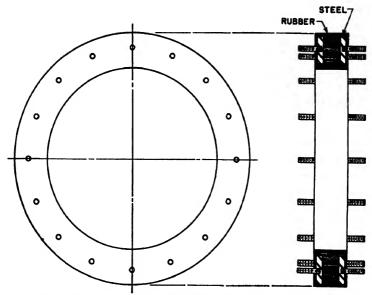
Rubber expansion joints for pipe lines employ soft rubber as the sole joining medium. Each steel ring is provided with a series of stud bolts on a standard bolt circle, for attaching to flanges of the adjoining pipe lengths.
